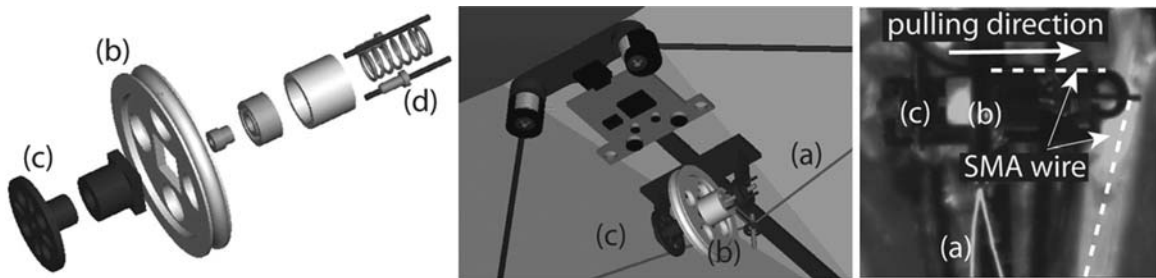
SMA-based release mechanism. The string (a) is attached to the wing tip and gets rolled up on the spool (b), which is connected to the gear (c). A $37\text{ }\mu\text{m}$ SMA wire pulls the spool laterally to unlock it from the gear and to allow the
